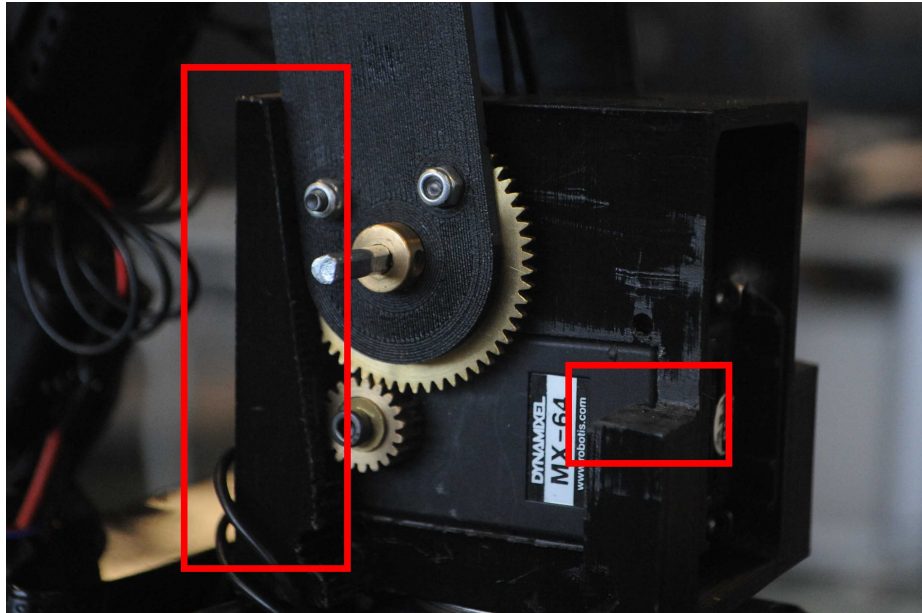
Shoulder Assembly Gearbox of LWMS
